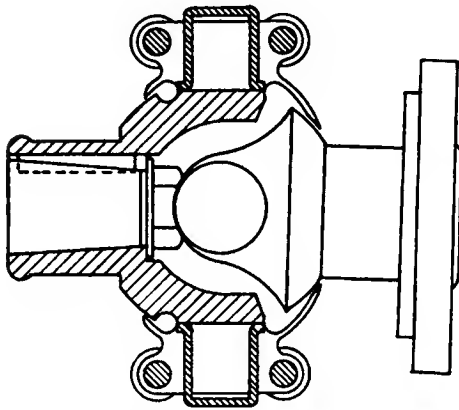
Ring joint of the Wolseley car. A compact form in which the enclosure is obtained without additional case parts
